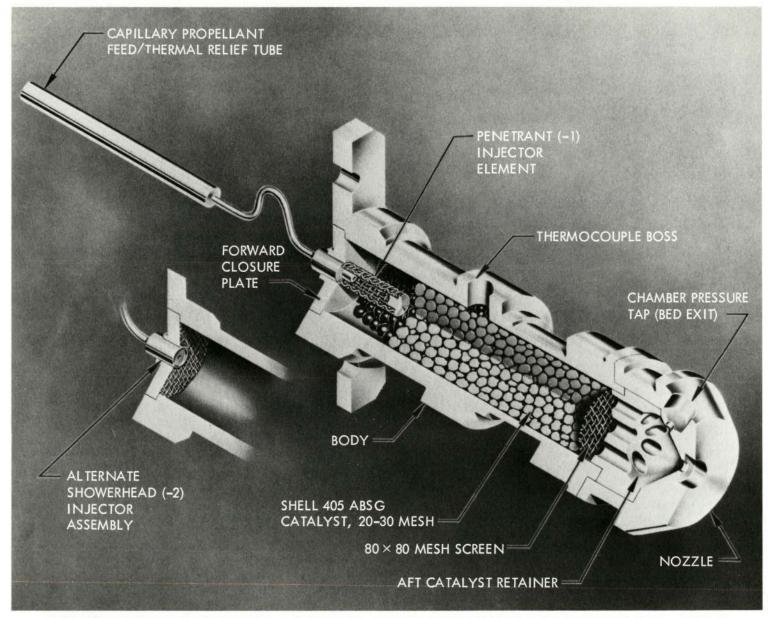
Conceptual drawing of thruster used in the Celestarium propulsion module
